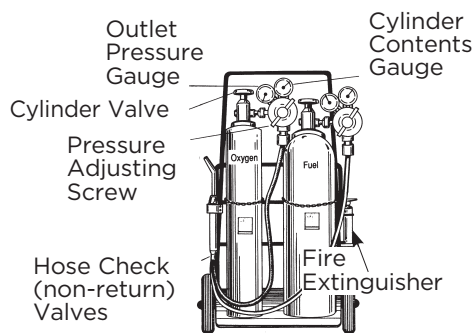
Buggy Equipped with a Fire Extinguisher
